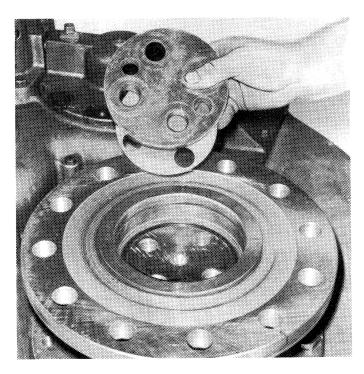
Retainer Washer and Shims Removed from Output Flange.
